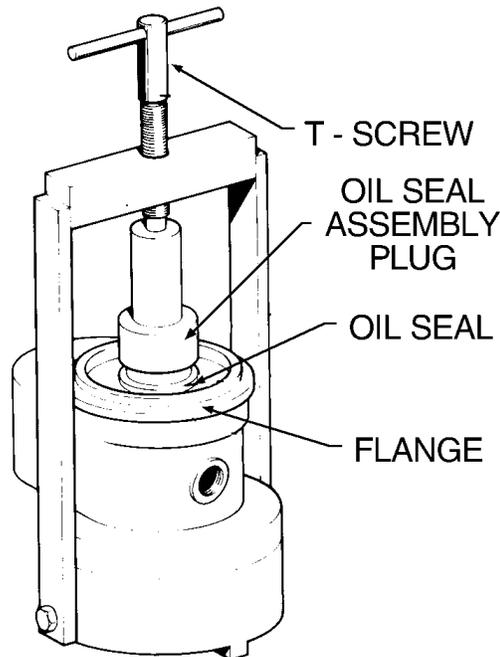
Magneto Oil Seal Installation on T-125 Assembly Fixture
